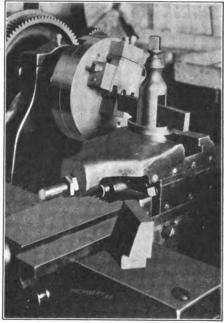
Boring, Threading and Facing Jaws in a Lathe
